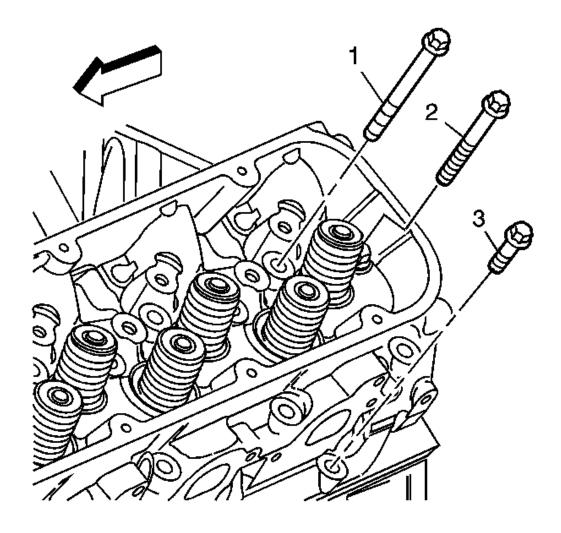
View Of Cylinder Left Head Bolts Courtesy of GENERAL MOTORS CORP.
